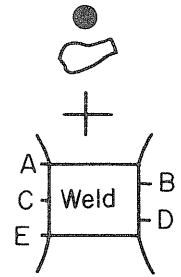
FRACTURE SURFACE, AND ULTRASONIC INDICATIONS RECORDED FOR SPECIMEN ND-8
